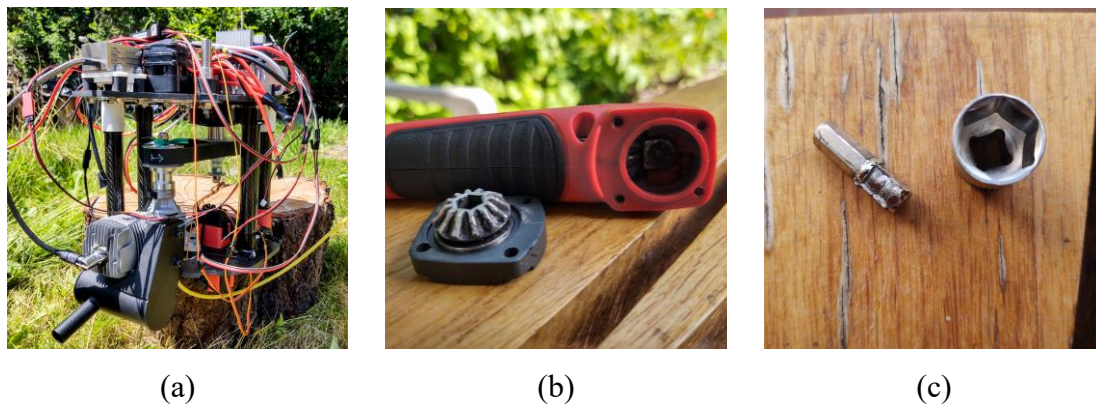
2nd PMSG unit (a), worn right-angle adapter (b) and deformed tools (c)
